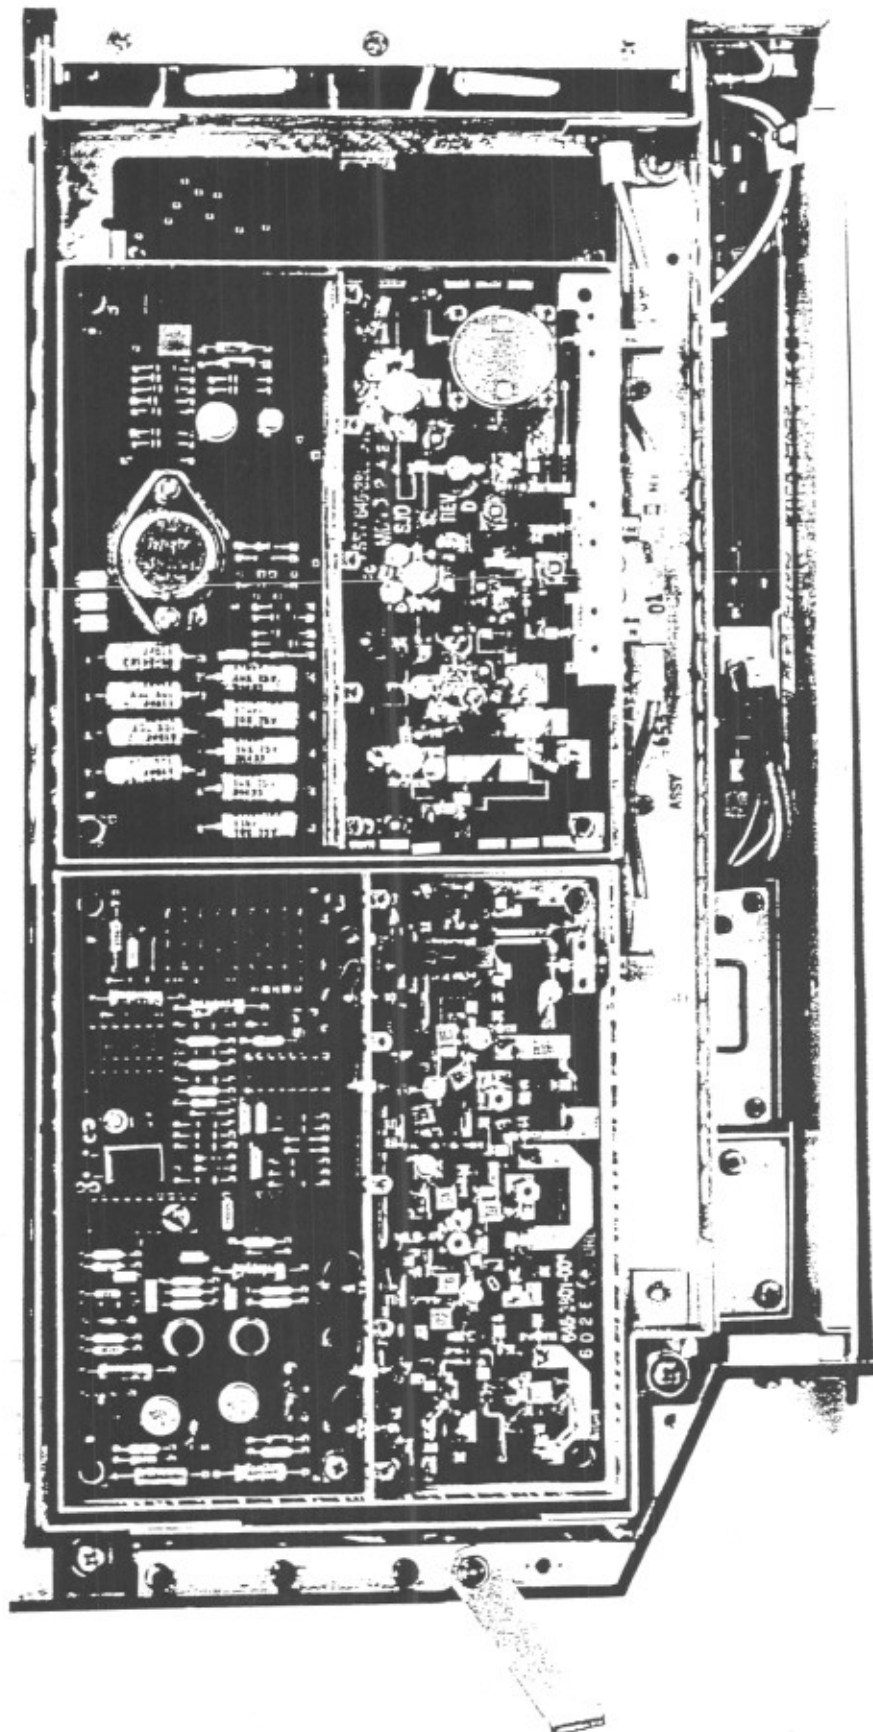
DME-900 Right Side Door Showing SMO and Driver
